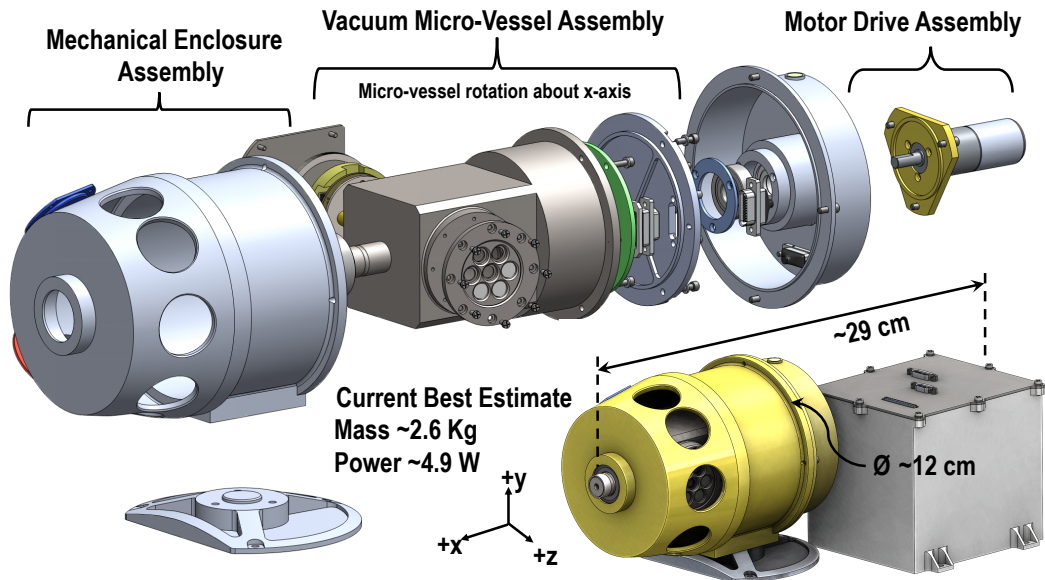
Top:* Exploded view of IG-NFR showing the vacuum micro-vessel, motor drive and mechanical enclosure assemblies. *Bottom:* Shows the assembled IG-NFR and the main electronics box with nominal dimensions. The improved IG-NFR design is capable of measuring energy flux in seven spectral channels from 0.2-300 μm in spectral wavelength, each with a 10° FOV projected into the sky, in five viewing angles. The rapidly changing temperature environment at Uranus during probe descent, from $\sim 50\text{ K}$ ($\sim 0.1\text{ bar}$) to $\sim 160\text{ K}$ ($\sim 10\text{ bar}$), is mitigated using a vacuum micro-vessel.
